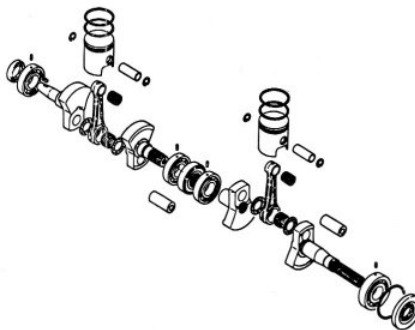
Another type of built-up crankshaft assembly used on two cylinder models.
